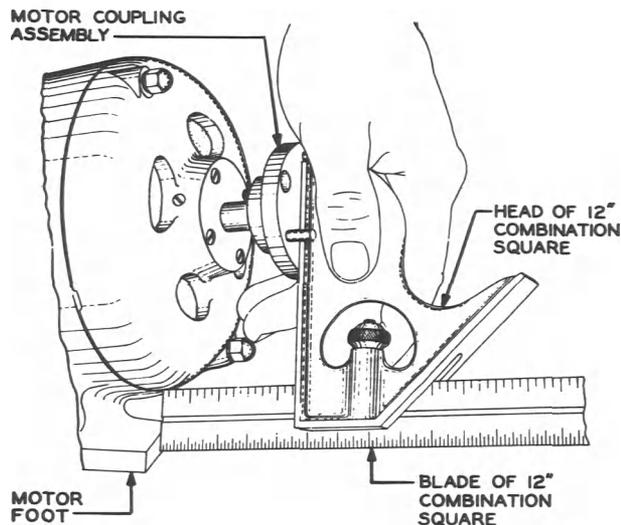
Method of Checking Motor Coupling Assembly Location
